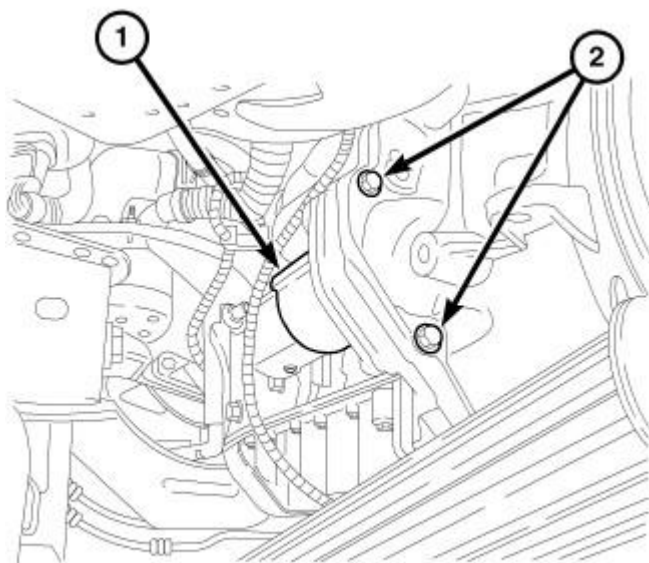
Crankshaft Hub, Electrical Connector, Mounting Bolt & CKP Sensor
